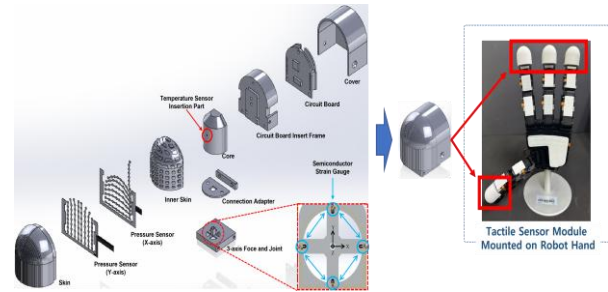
Configuration and Assembly View of Tactile Sensor Module.
